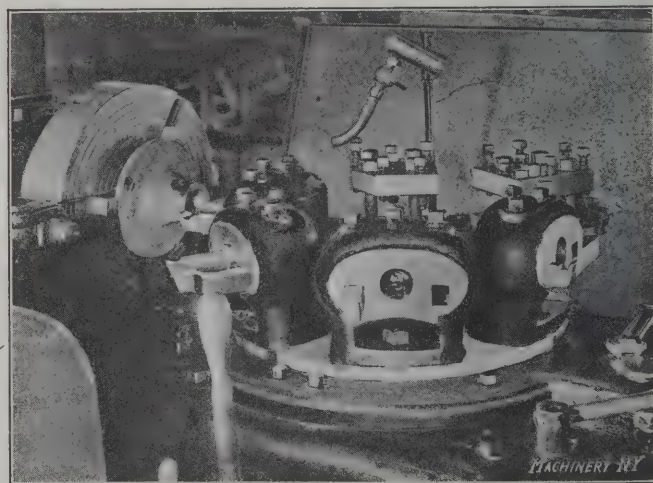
The First Turret Lathe Operation in Finishing the Gear Case Covers
